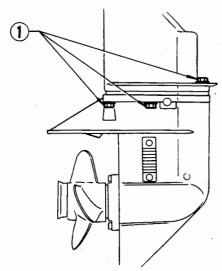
Removing the gear case (M25C₂, M30A₃)
